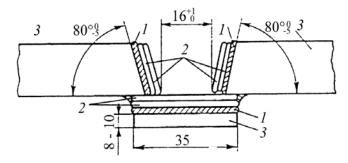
Diagram of edge preparation by deposition for testing of deposited metal 1 - transition layer/backing (welding consumables of Grades A-9sp and A-10sp); 2 - main cladding layer (welding
